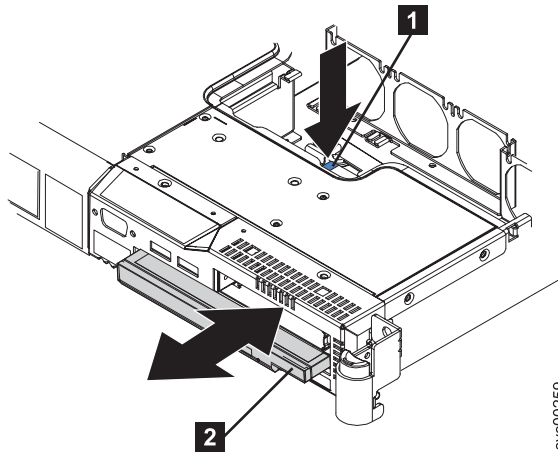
Releasing and sliding out the dummy CD/DVD drive
